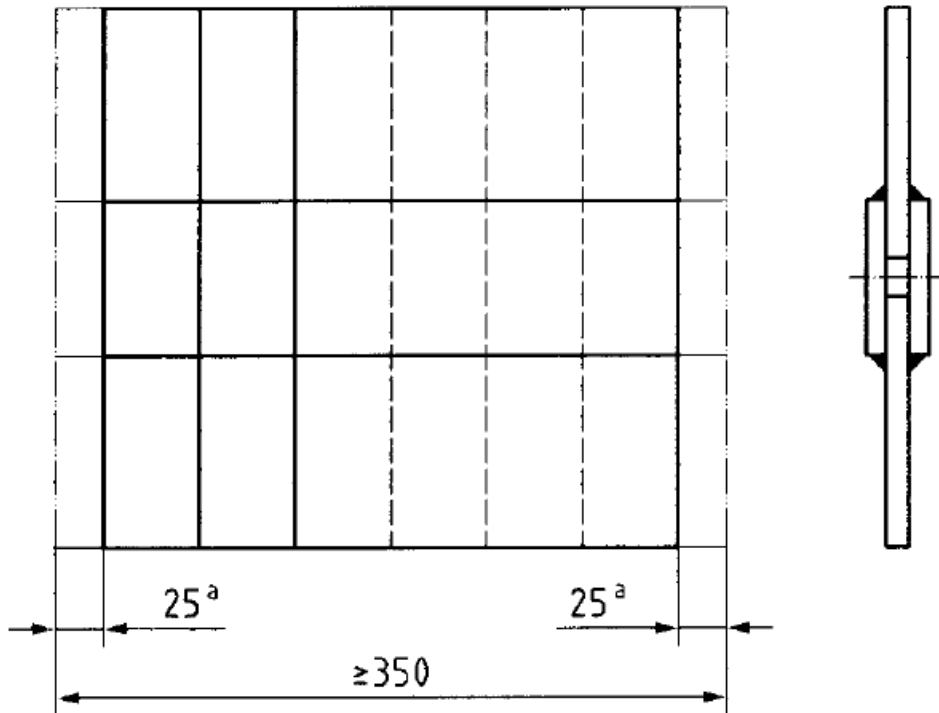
Location of specimen from a lapped joint. *a* End pieces are to be discarded.
